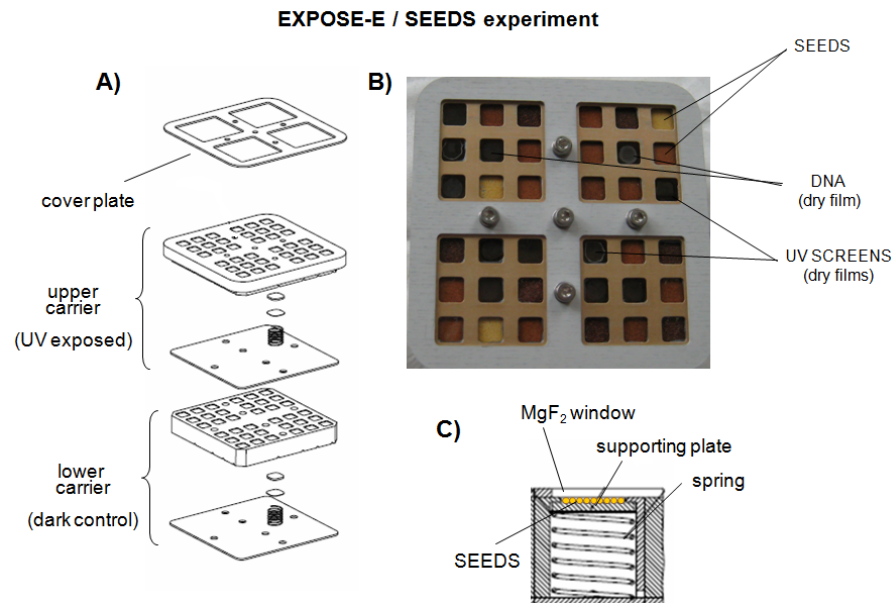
Design of the EXPOSE-E/ SEEDS experiment. Drawing of the EXPOSE-E/ SEEDS sample carrier assembly (exploded view) (A). Loaded and assembled EXPOSE-E/ SEEDS sample carrier (top view) (Photo taken by Andreja Zalar) (B). Detail of a sample cell loaded with seeds (cross-section drawing) (extracted from technical drawings made by HTS AG., Wallisellen, CH) (C).
